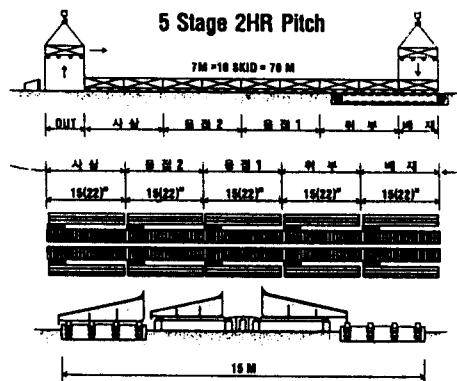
Example of Sub-Assembly Welding Line
